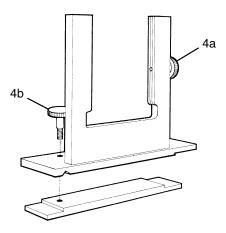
Slide holder showing the side screw (4a) and clamping screw (4b)
